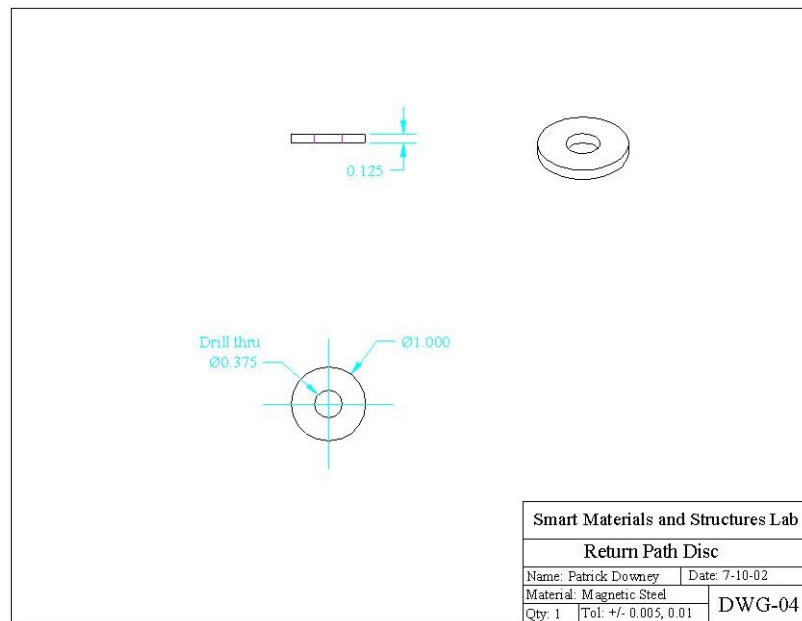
Mechanical drawing of a magnetic circuit steel piece.
